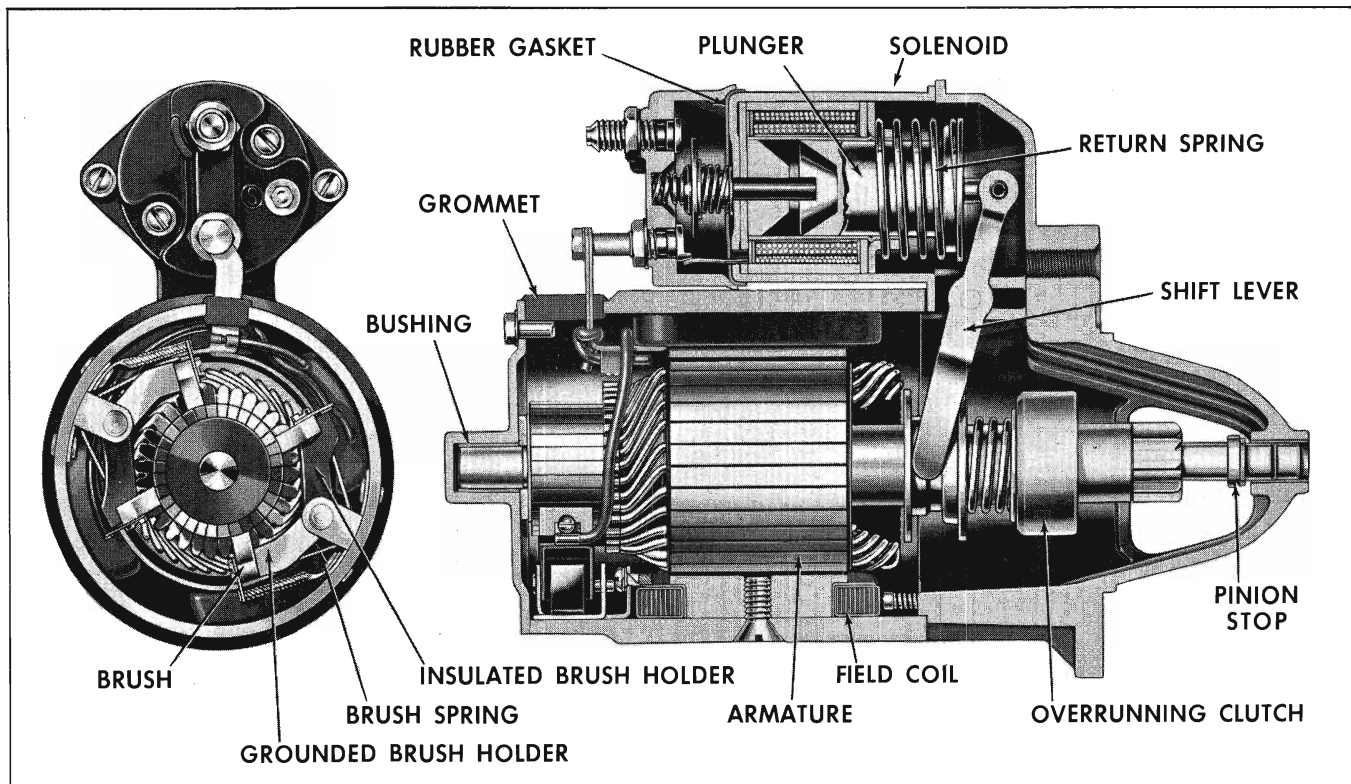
Cross Section of Starter Motor and Solenoid Assembly—Synchro-Mesh Transmission
